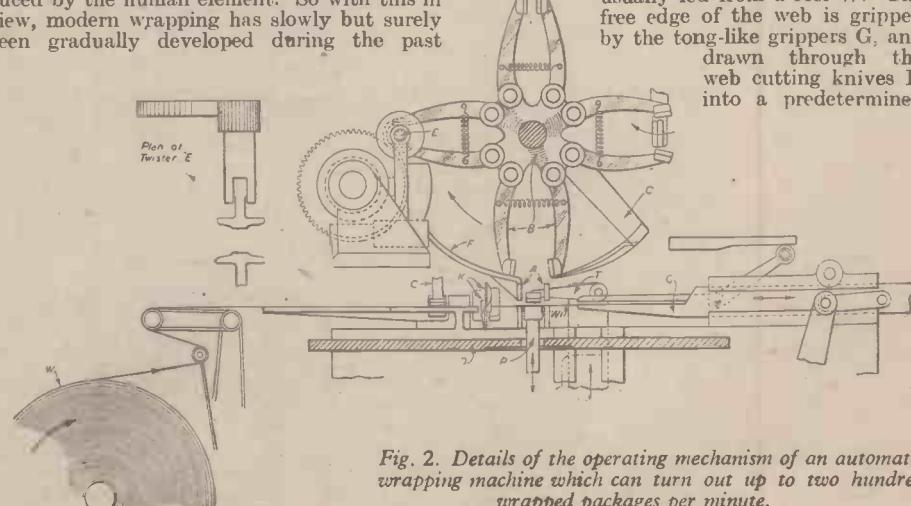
Details of the operating mechanism of an automatic wrapping machine which can turn out up to two hundred wrapped packages per minute.
